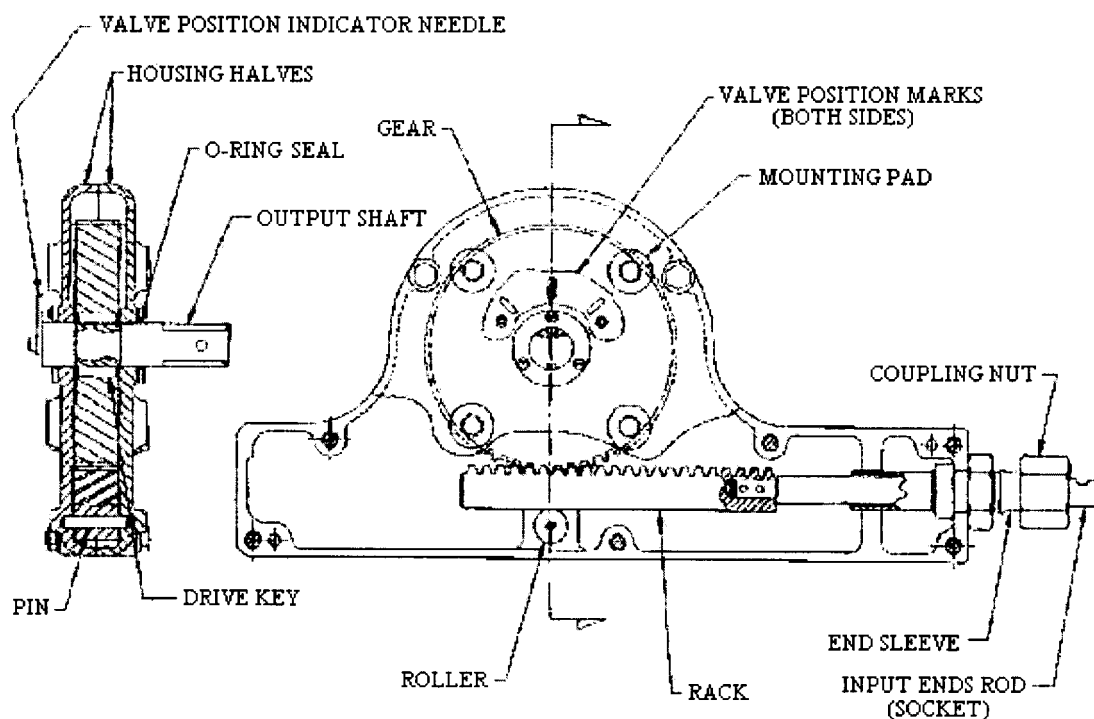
Single Linear Ball Bearing 1/4 turn system-interface between actuators and ball bearing control
